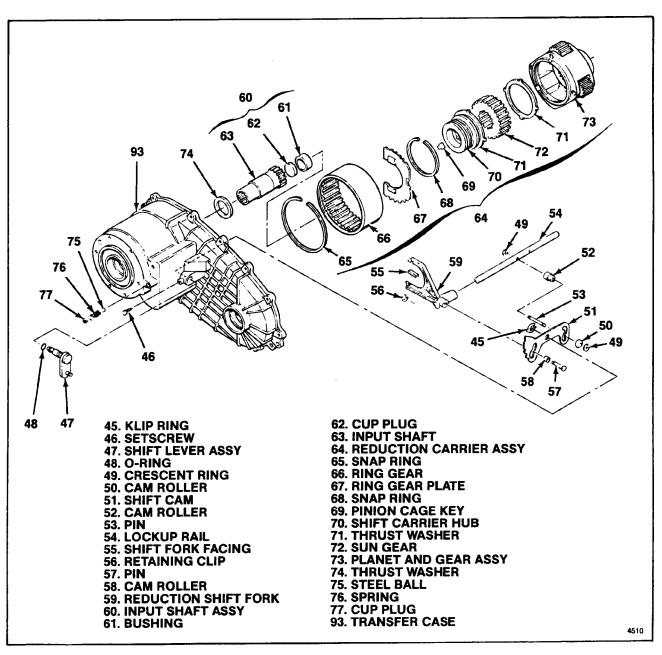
Reduction Shift, Carrier and Input Shaft Parts
